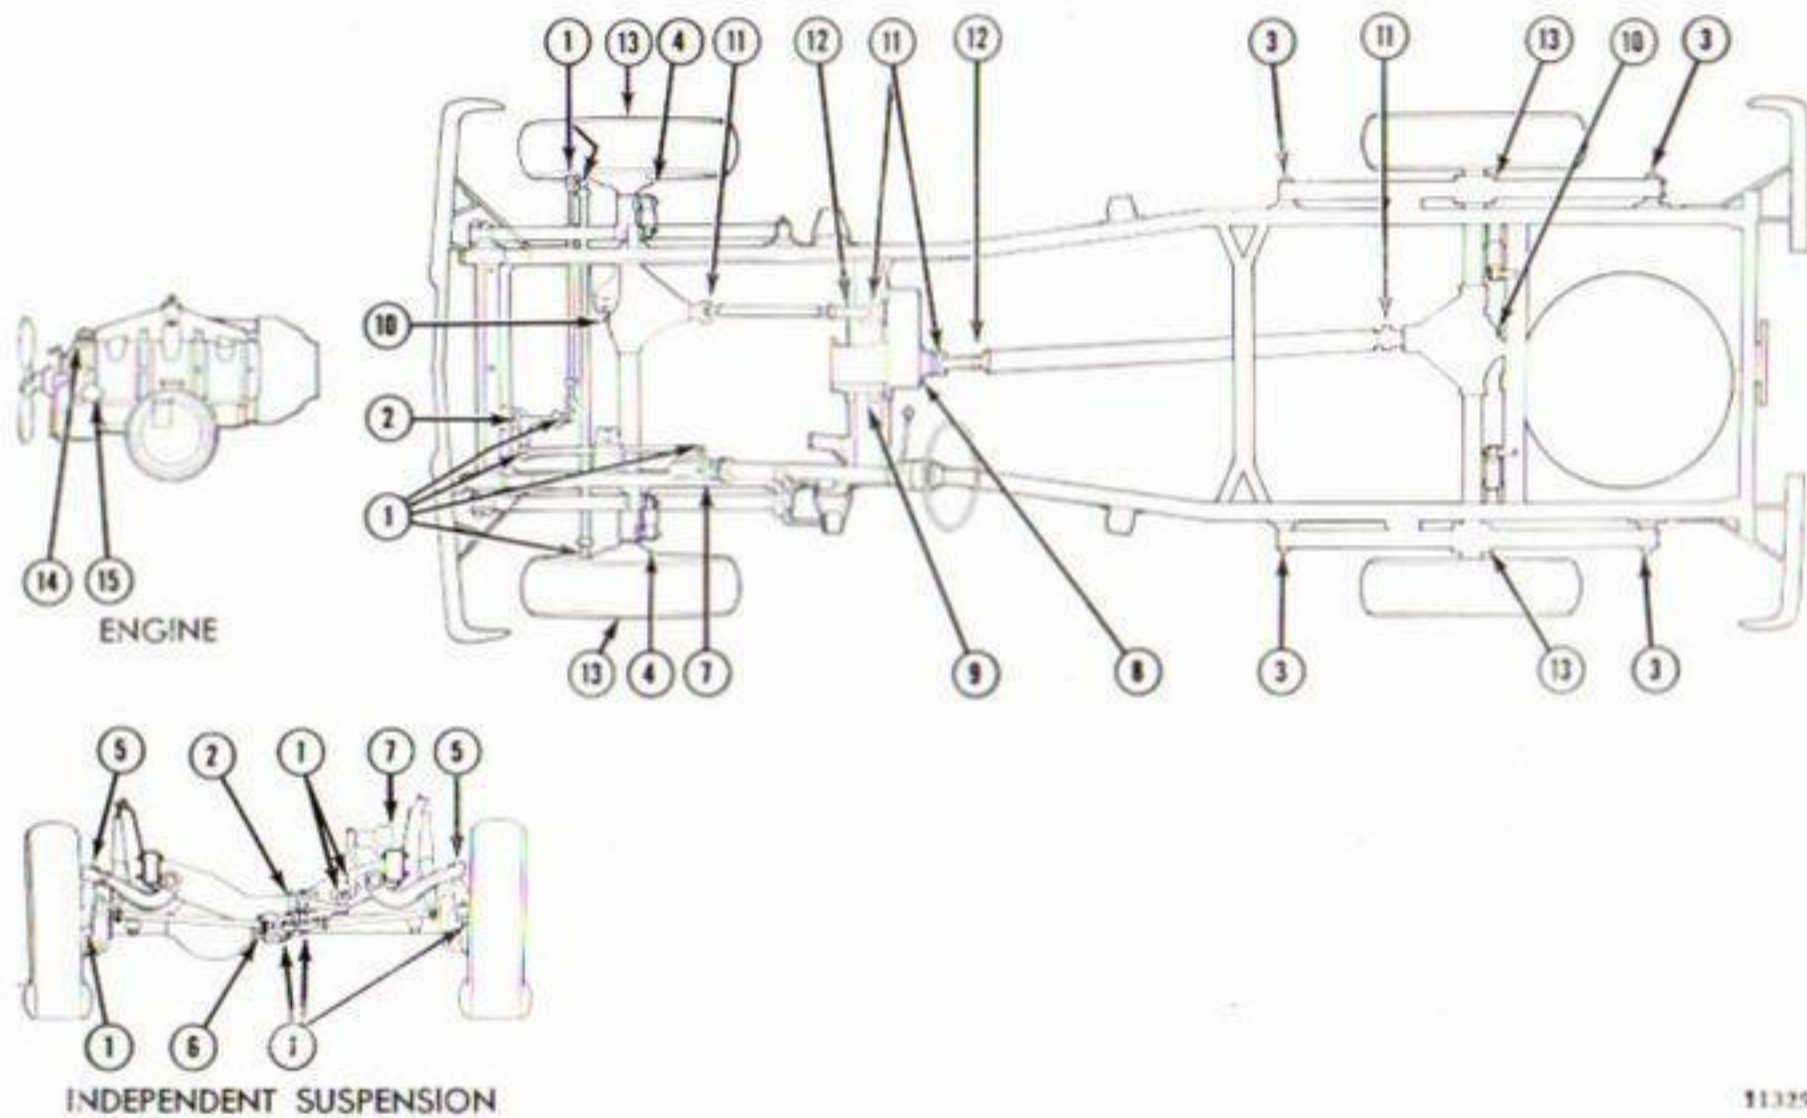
LUBRICATION CHART—4-WHEEL DRIVE
